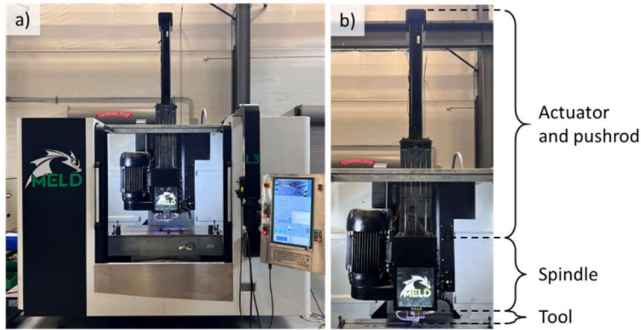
a) MELD Manufacturing L3 AFSD machine. b) Details for actuator and pushrod, spindle, and tool assembly.
